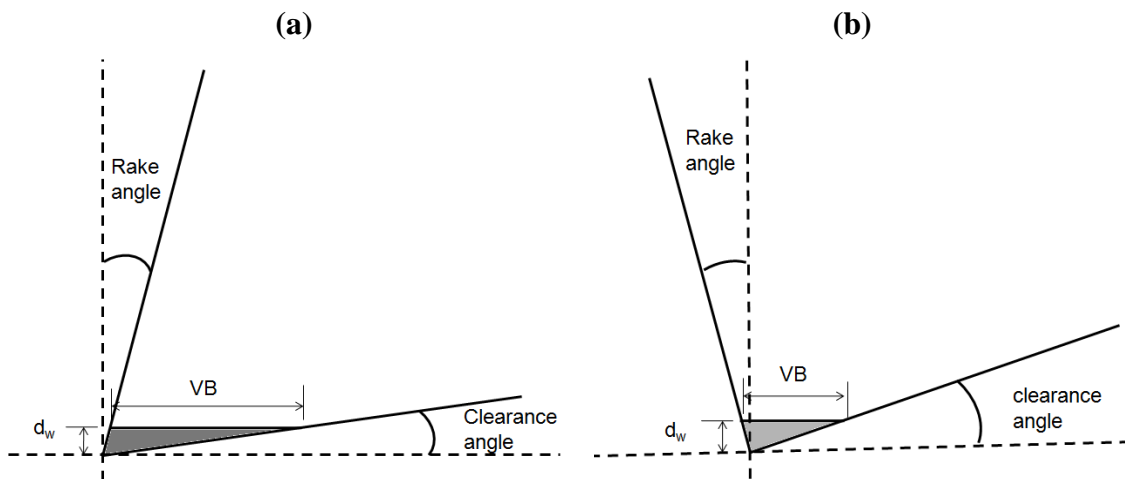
Tool geometry of flank wear of sharp tool (a) positive rake angle (b) negative rake angle
